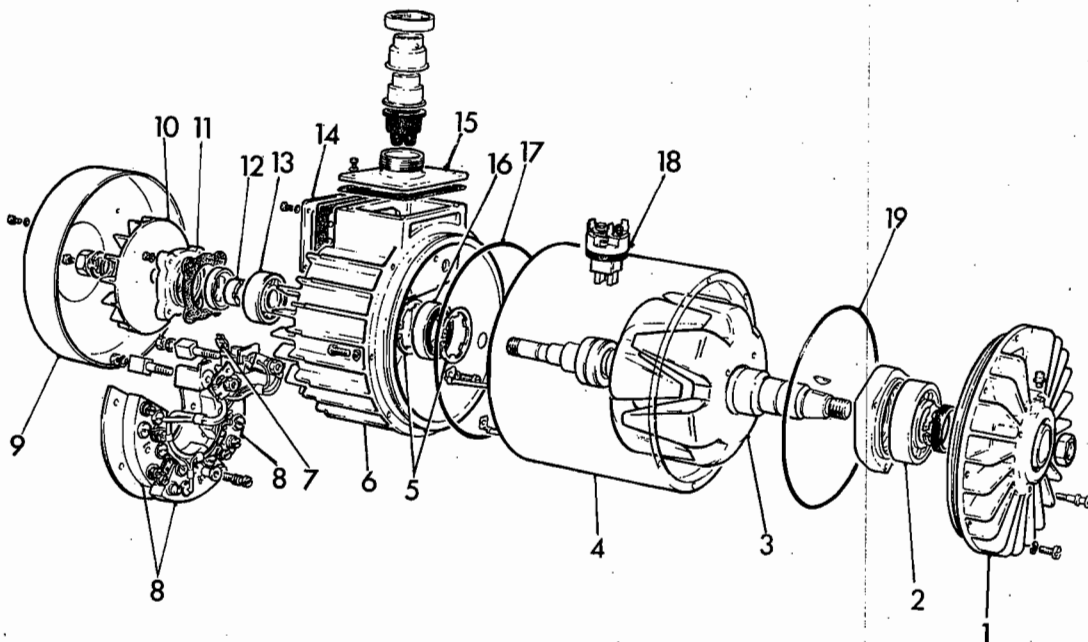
EXPLODED VIEW OF ALTERNATOR
